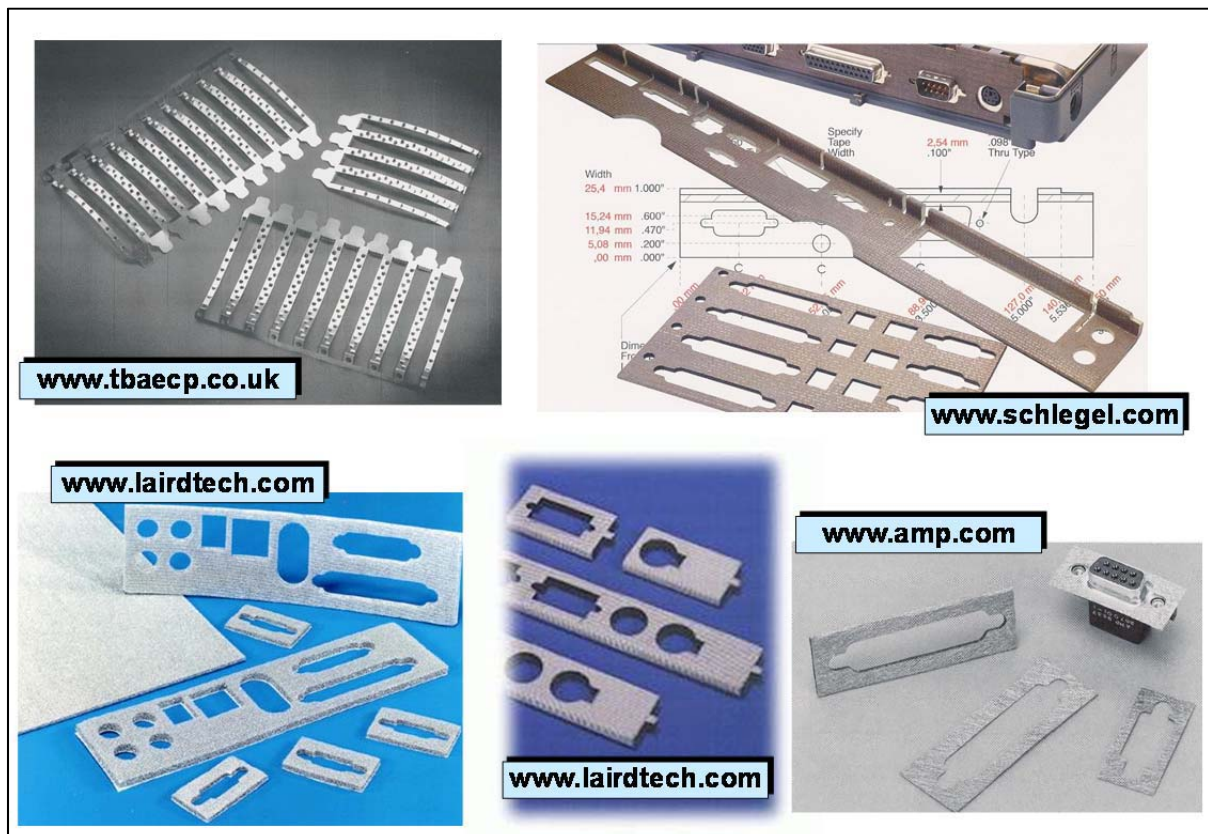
Examples of die-cut conductive gaskets suitable for bonding to PC chassis
